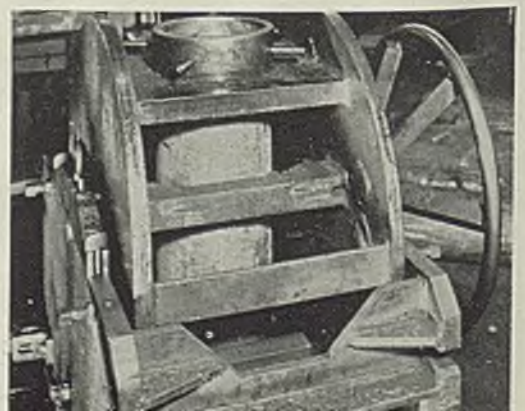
After loading, the trunion fixture is pulled into position under the drill press by an air cylinder; the fixture is indexed 90 degrees, and the rear end of the 8-inch casting is drilled. Then the trunion fixture is indexed 180 degrees, and the front end is drilled. Indexing is done with the handwheel, positioning being accomplished by the positioning pin and holes visible on the trunion fixture. When ready to be unloaded, this fixture is moved out from under the drill press. The air cylinder that does the moving is shown at the lower righthand side of the press
